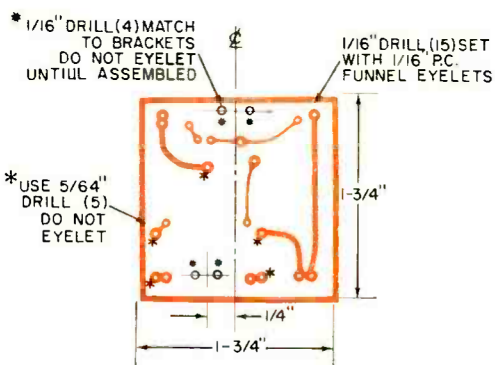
This is foil side of printed circuit board. Numbers in parentheses indicate holes required.
